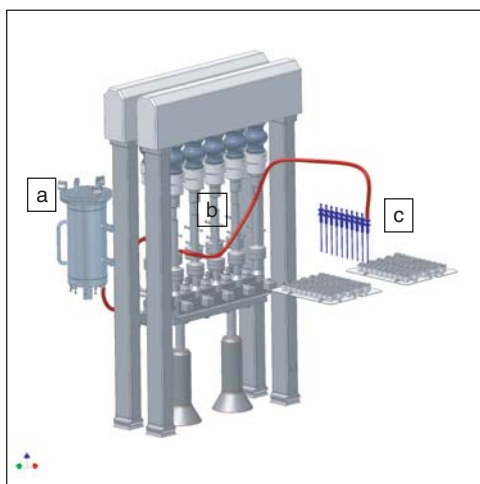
Schematic figure of a rotary piston pump filling system: (a) manifold; (b) fill pumps; (c) fill needles.
